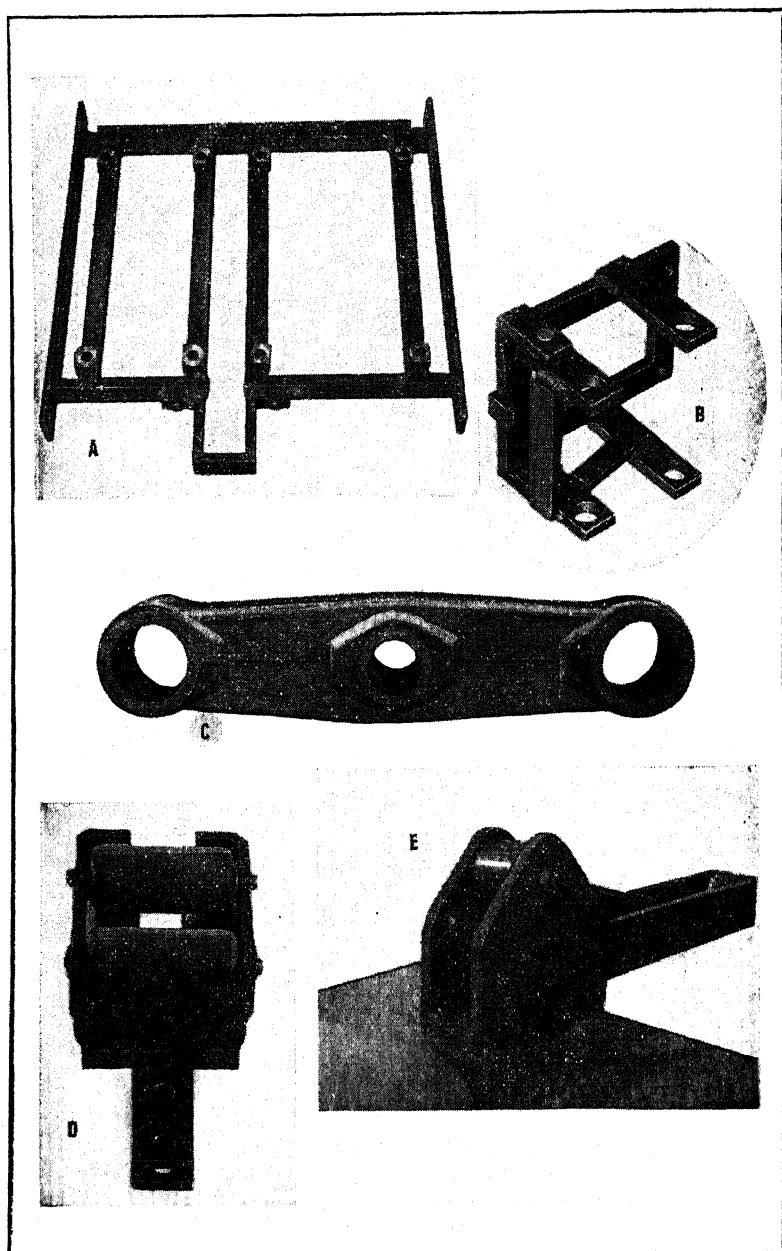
FRAMES—(A) Roller table frame for dry ice saw. (B) Idler pulley frame. (C) Rocker beam for earth-mover wheels. (D) Cable guide for mining machine. (E) Pressure block housing for bar bending machine.
